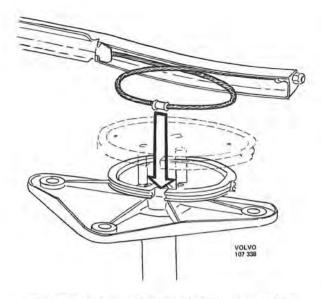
Installing cable for parallel drive link, right-hand side
